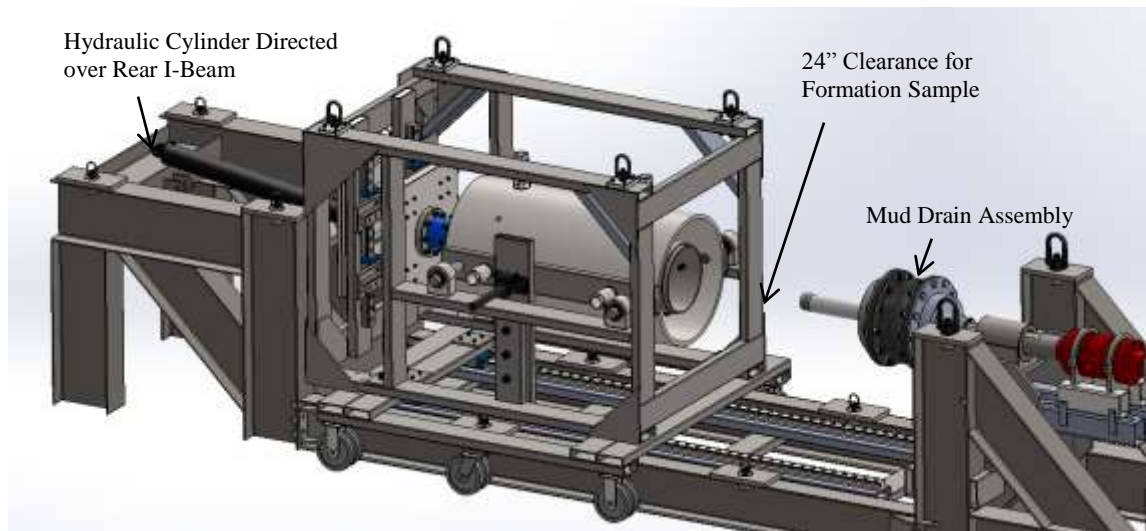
CAD Model showing the repositioning of the hydraulic cylinder and the drain assembly for sample loading
